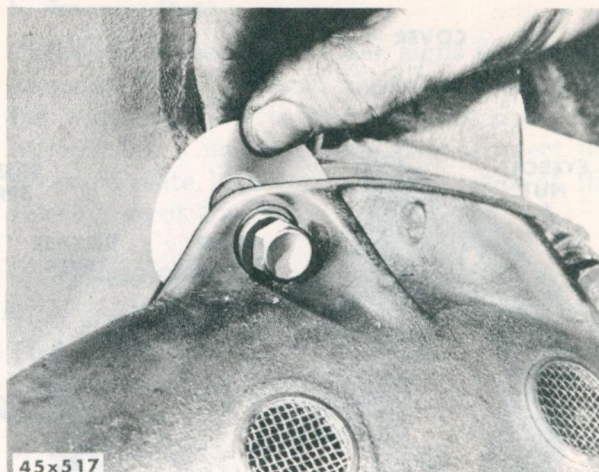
Installing Shims between Cylinder Block and Clutch Housing
